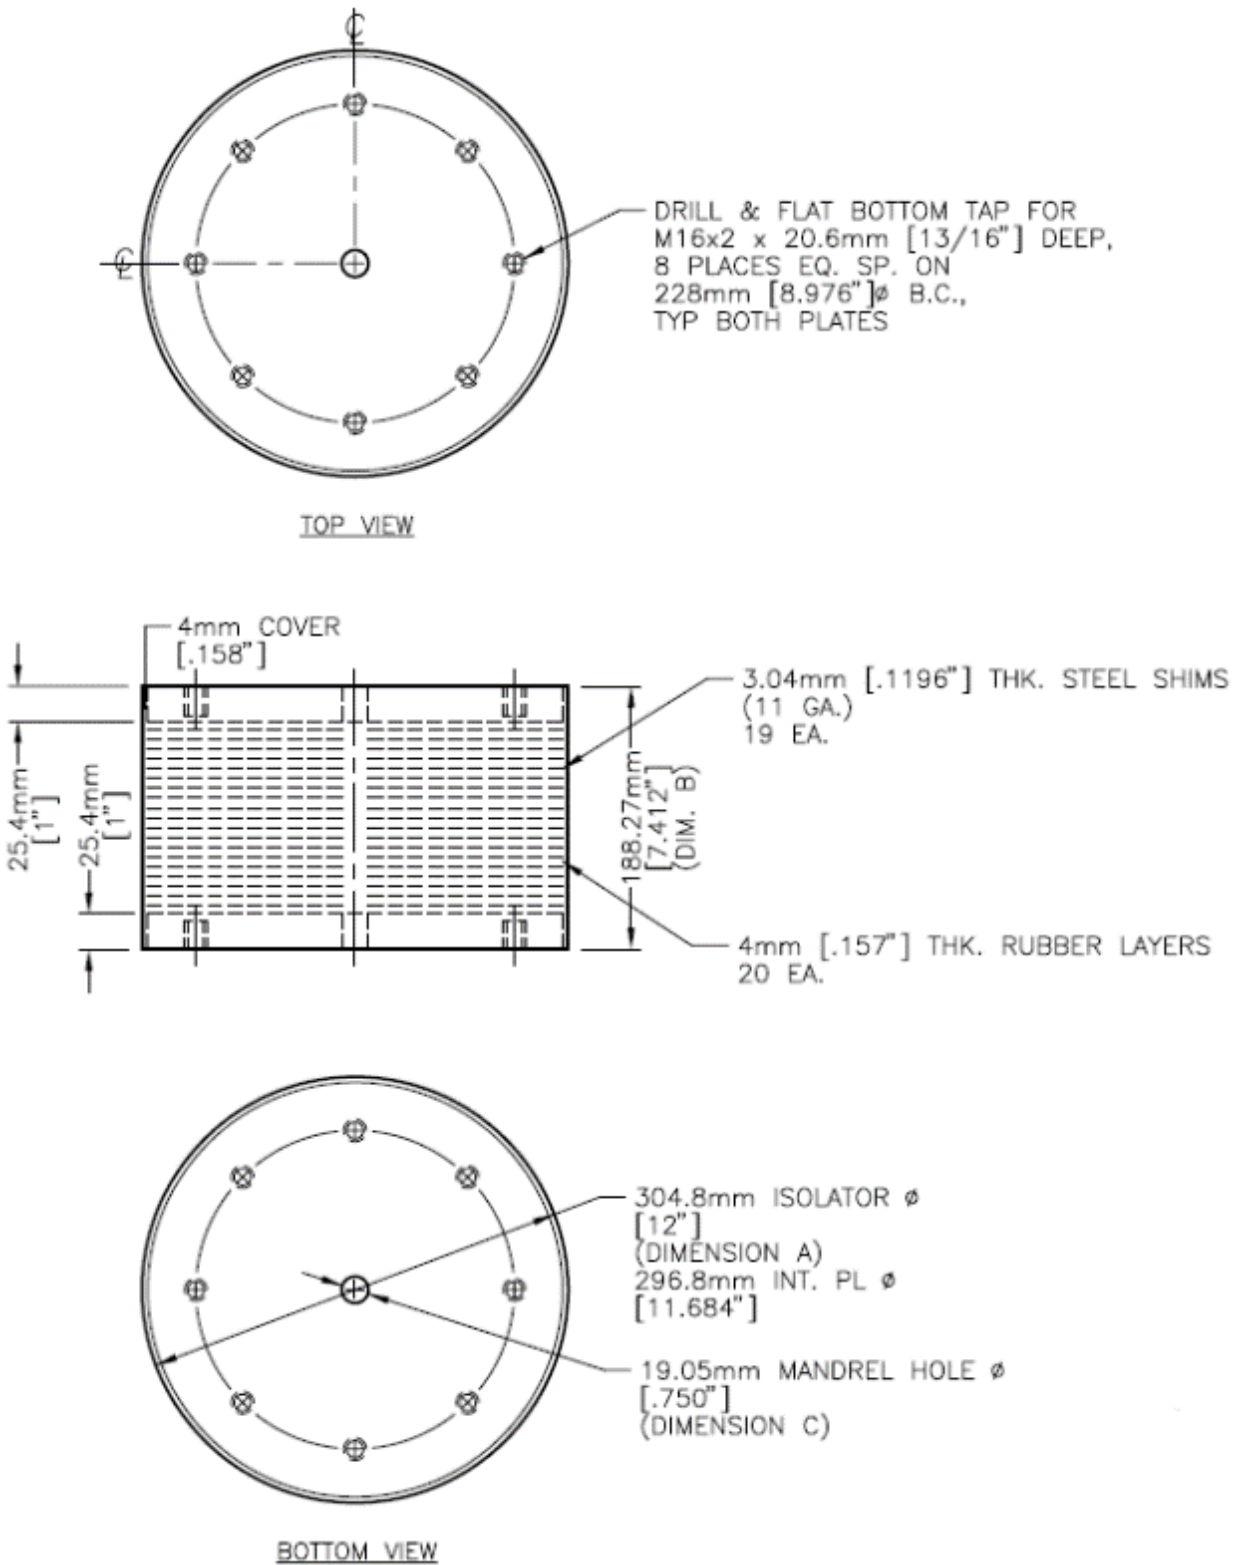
DIS bearing type B, DB (courtesy of DIS, Inc.)
